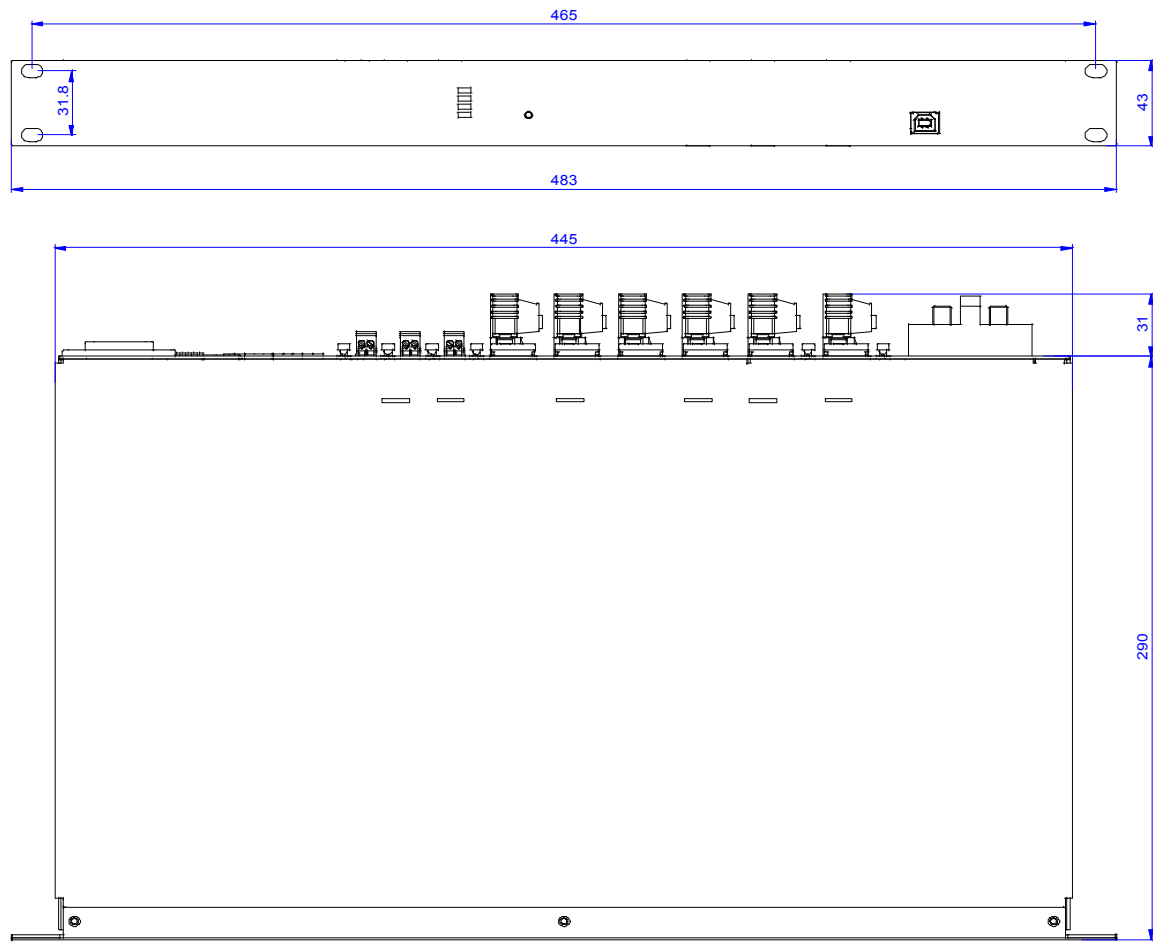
View and dimensions of ZDSO400-ER1 power supply – model 1
